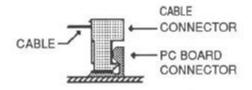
MASS TERM CONNECTOR Some of the options require attachment of cables to the options pc board. The "mass term" type connectors have an identification number on the cable connector which matches the same number printed on the top of the pc board. The polarity of the connectors is as shown in the diagram.
